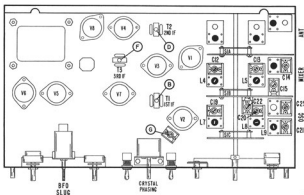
Bottom View of Chassis Showing Tube Locations and Alignment Adjustments
